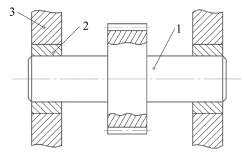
The layout of the supports of the fuel gear pump: 1 - shaft; 2 - hydrostatic bearing; 3 - housing
